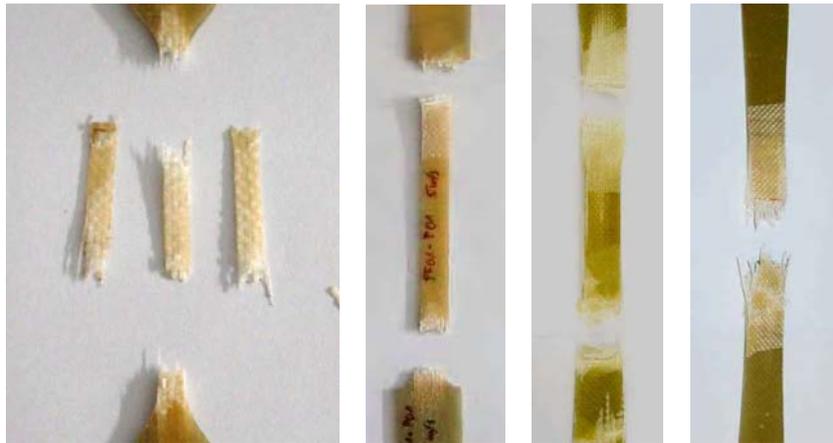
Fracture types of high-speed test specimen with conventional and optimised geometries
